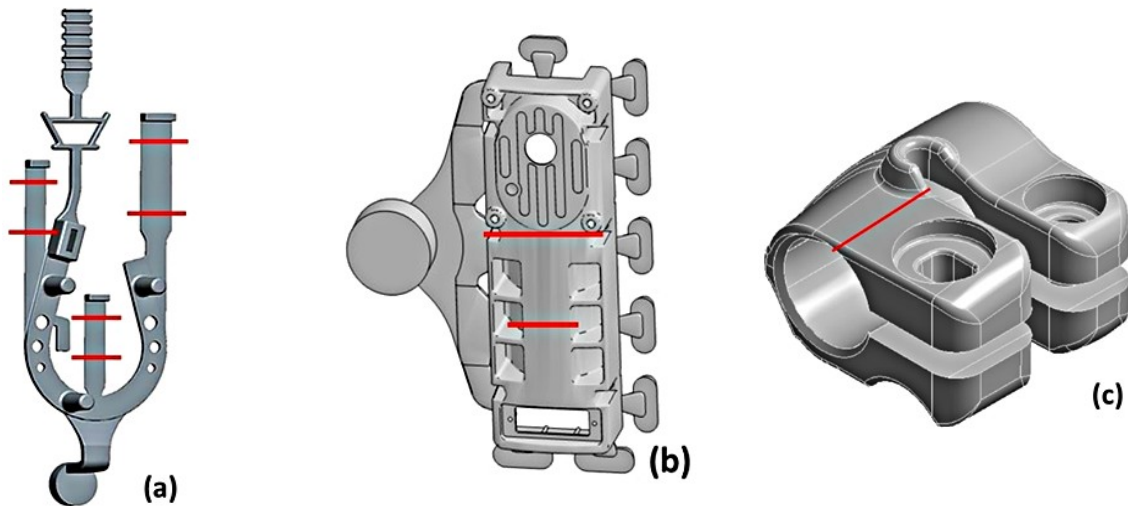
Metallographic section positions (a) *Horse-shoe* reference casting, (b) Gear motor housing, (c) sleeve
